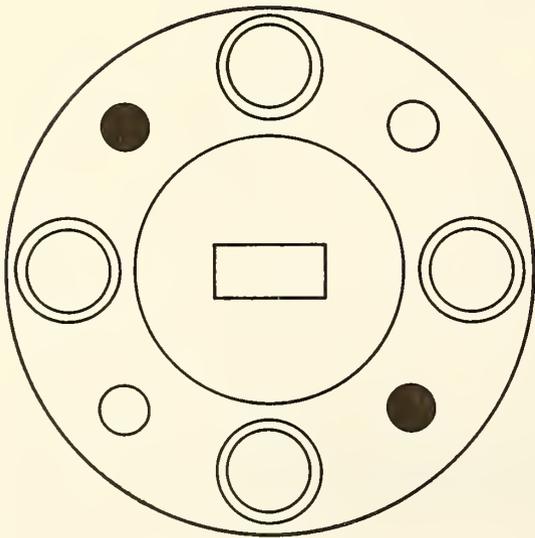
(b). UG-385/u flange with enlarged bossed surface.
